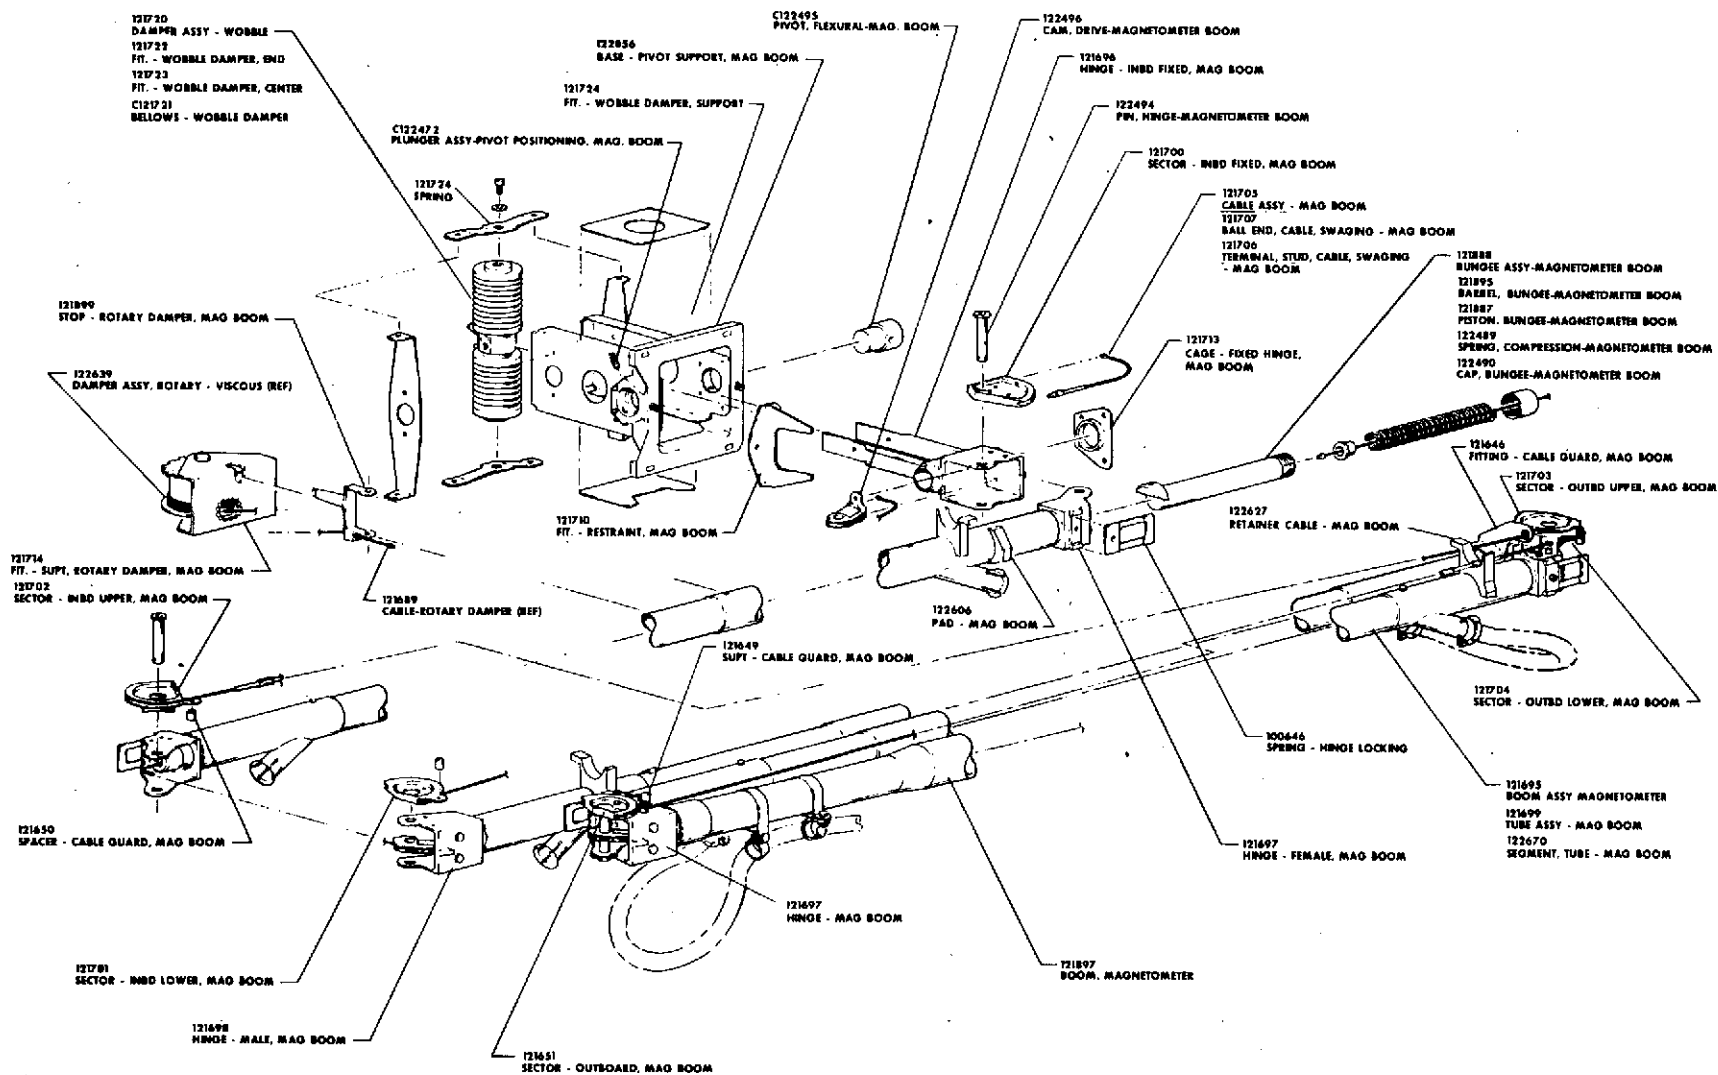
Pioneer F/G Magnetometer Boom Details
